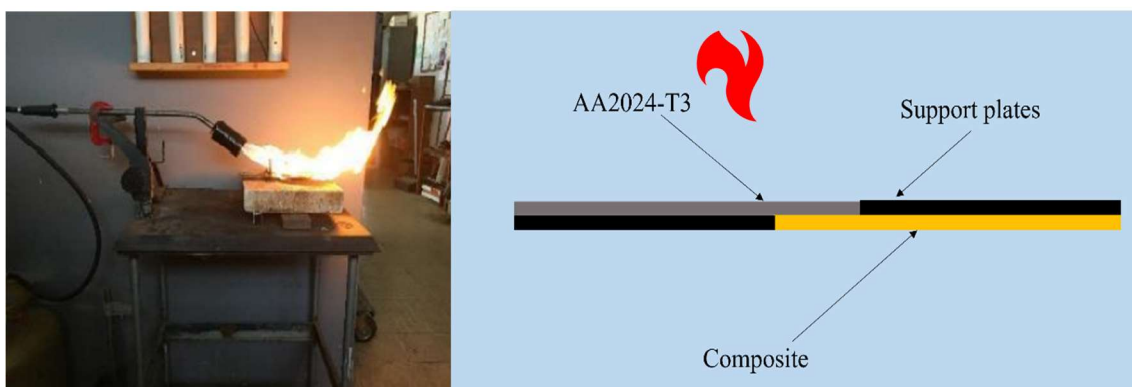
Welding of aluminum samples with thermoplastic composite.
